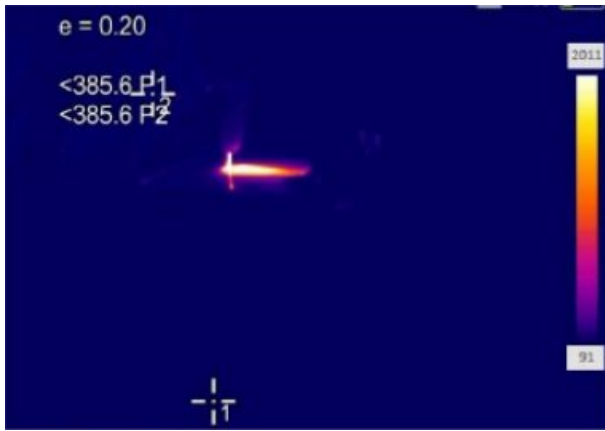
Temperature measurement of AISI304 and SA213T22 TIG Welding by using thermal camera.
